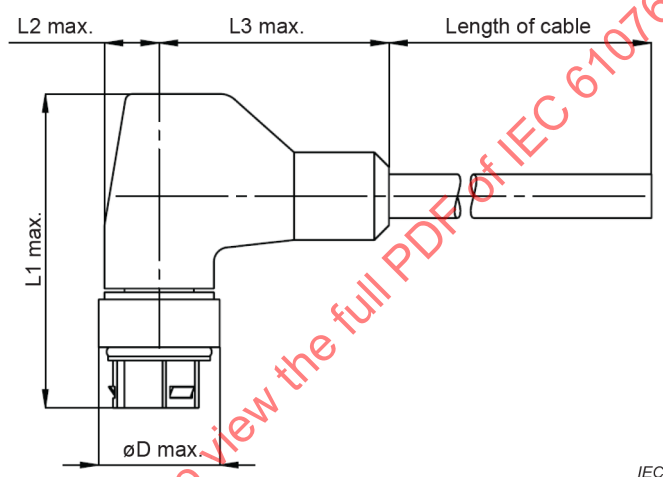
Style NM_PPI – Non-rewirable connector, male contacts, right angled higher version, with inner push-pull locking
